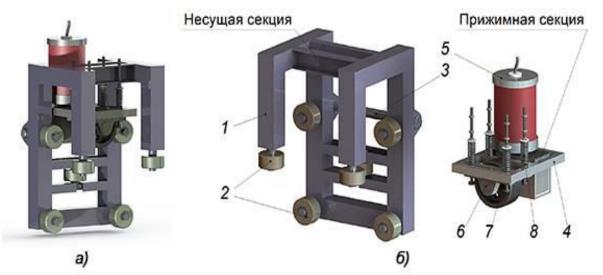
Conveyor drive suspension with suspended belt and distributed drive: a - general view; B - layout diagram
